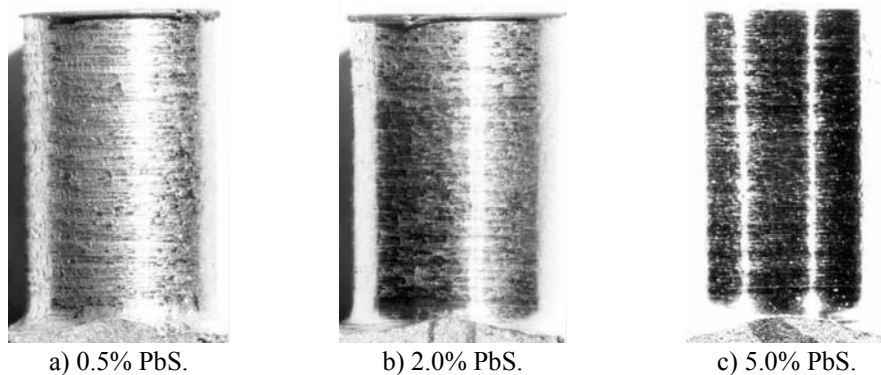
Machined surfaces of sintered steel Fe-0.8 %C containing PbS (admixed). Finish turning, hardmetal insert P20, $v_c = 15$ m/min, 0.15 mm/rev.
